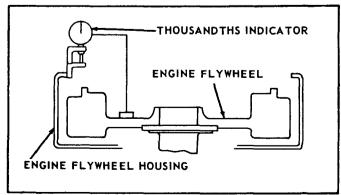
Checking the Bore of the Engine Flywheel Housing.
